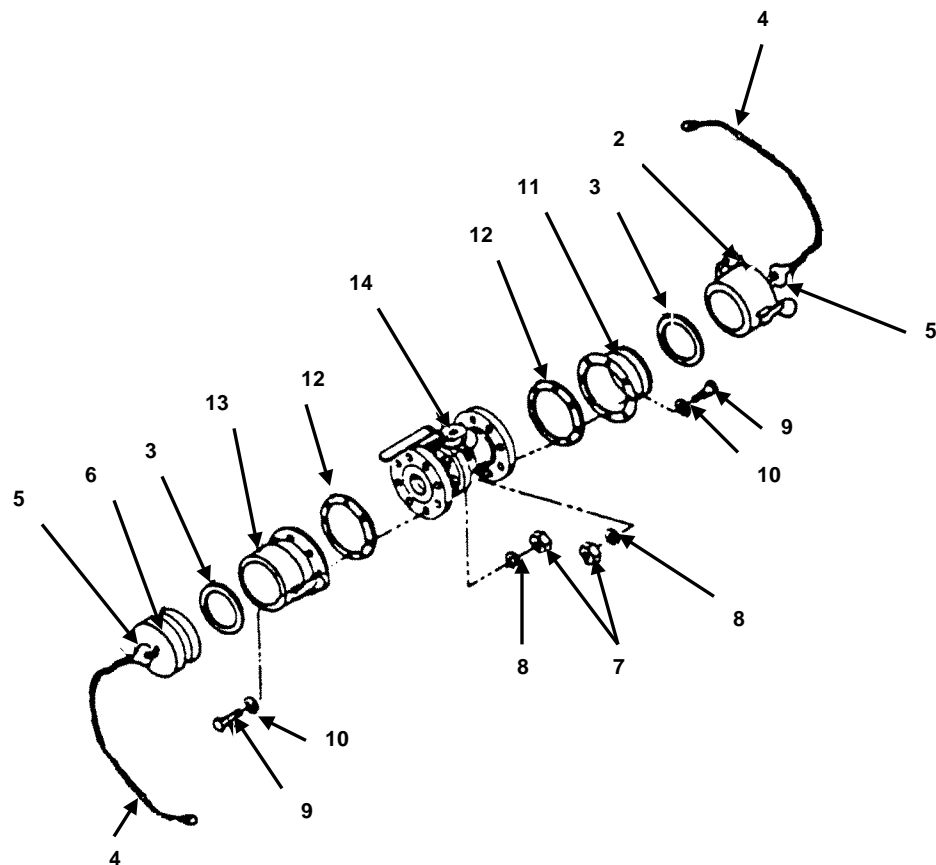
Filler/Discharge Valve Assembly (Ball Valve)
